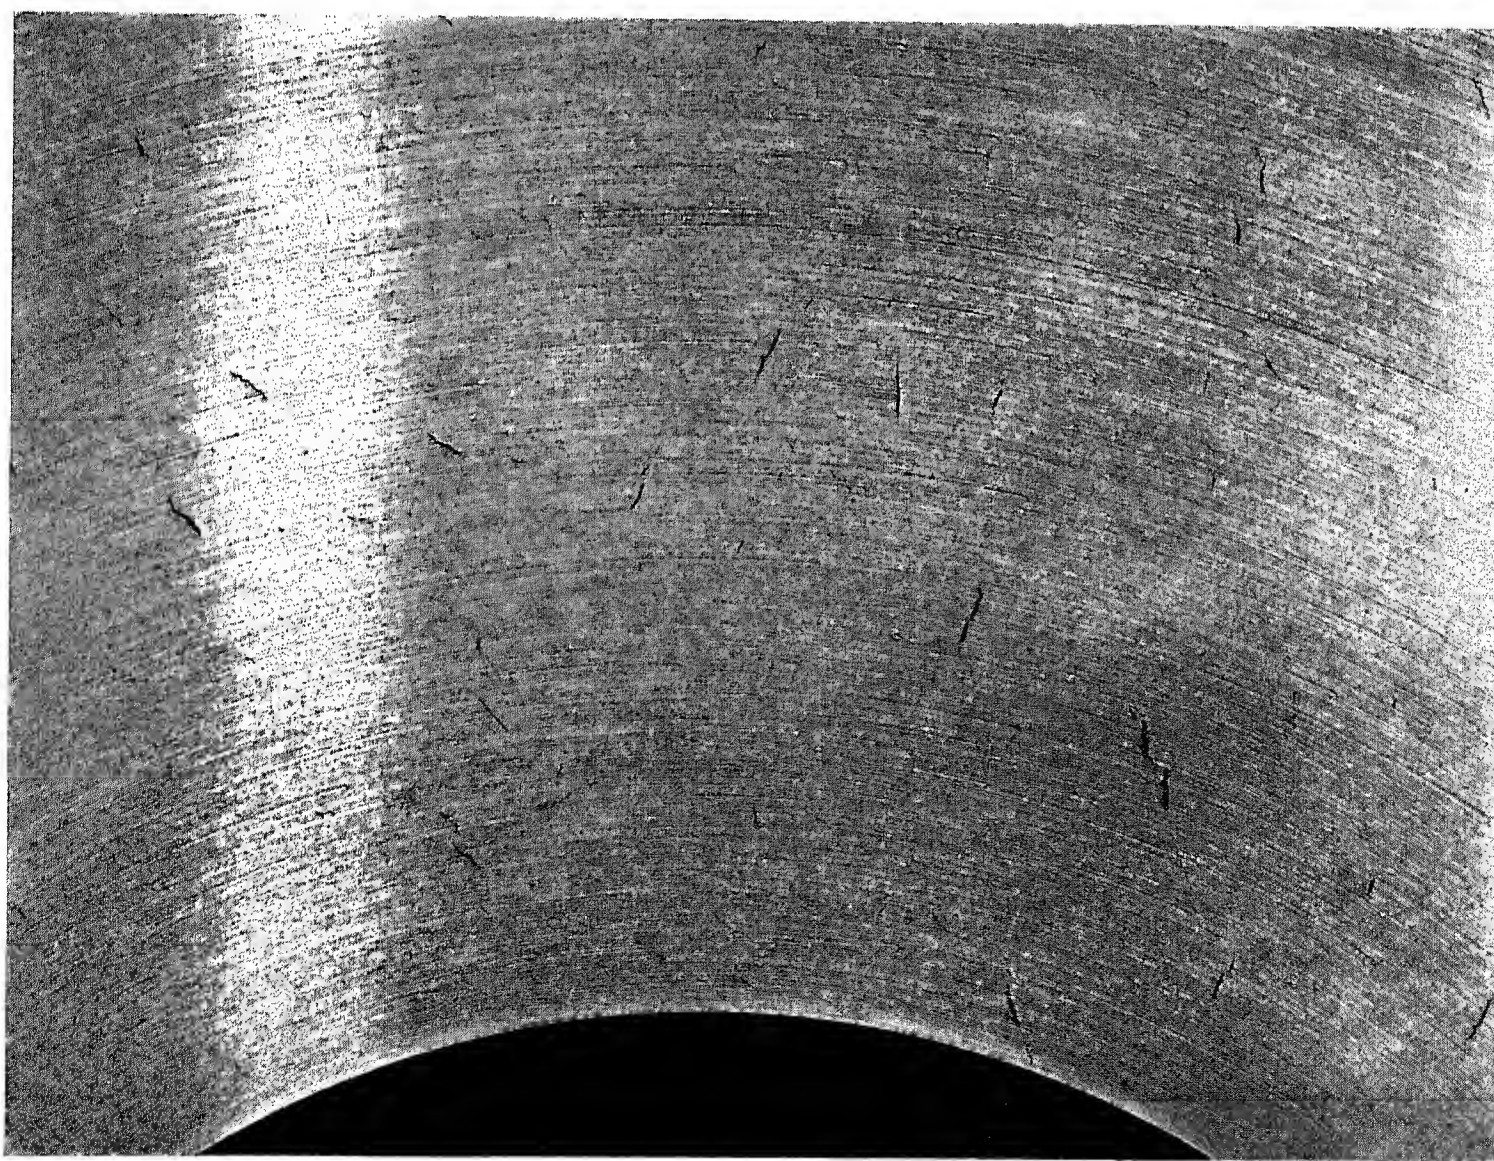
Fig. K.—Hair cracks on end surface of bored shaft seen in Fig. J. (Three-quarters natural size.)
